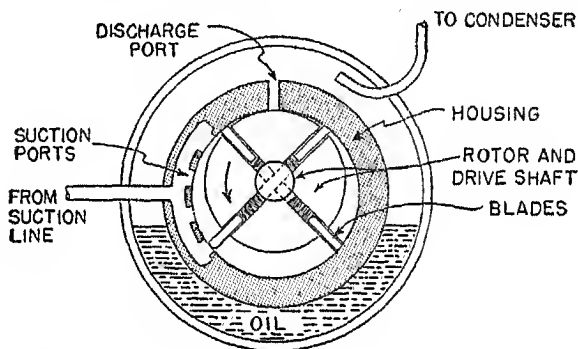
A Rotary Compressor with Four Sliding Blades or Vanes.
